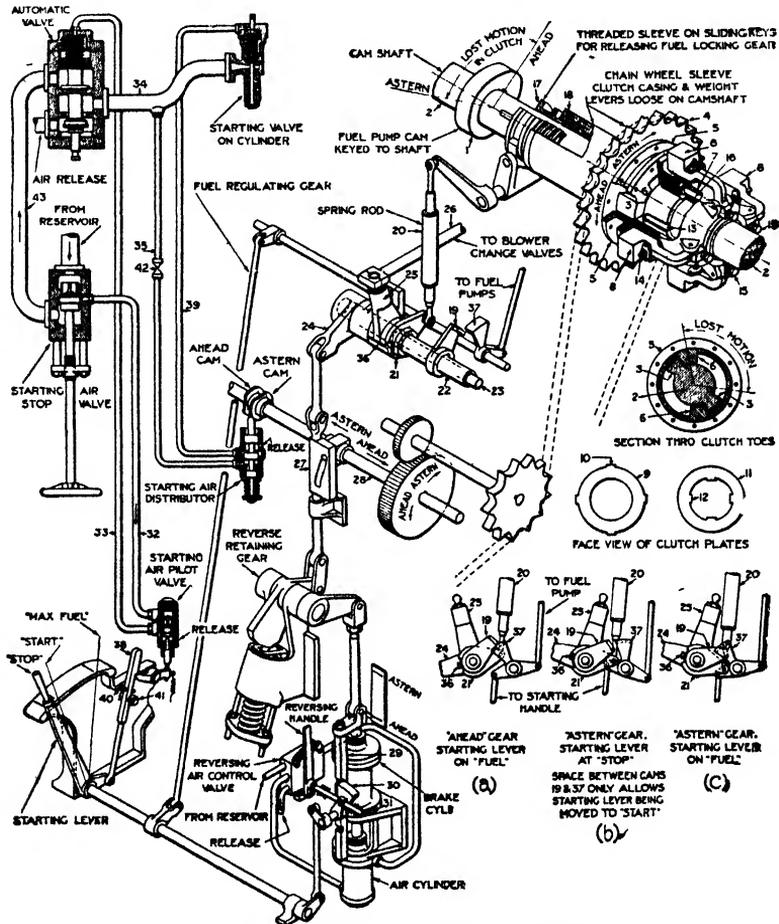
Reversing Gear of Double-acting Two-cycle Engine
